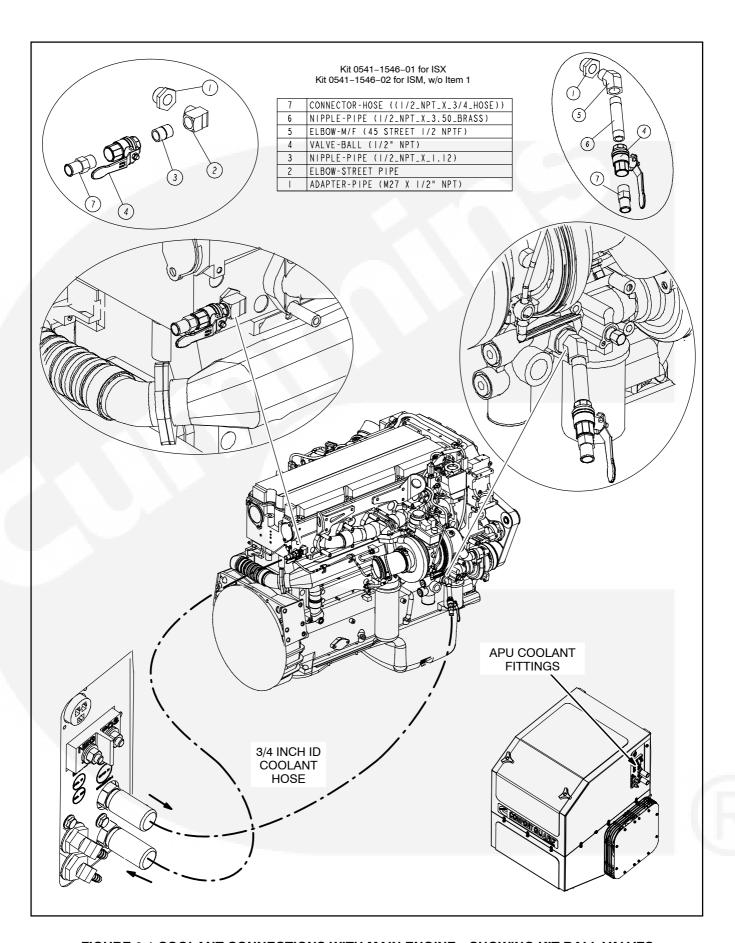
COOLANT CONNECTIONS WITH MAIN ENGINE—SHOWING KIT BALL VALVES
